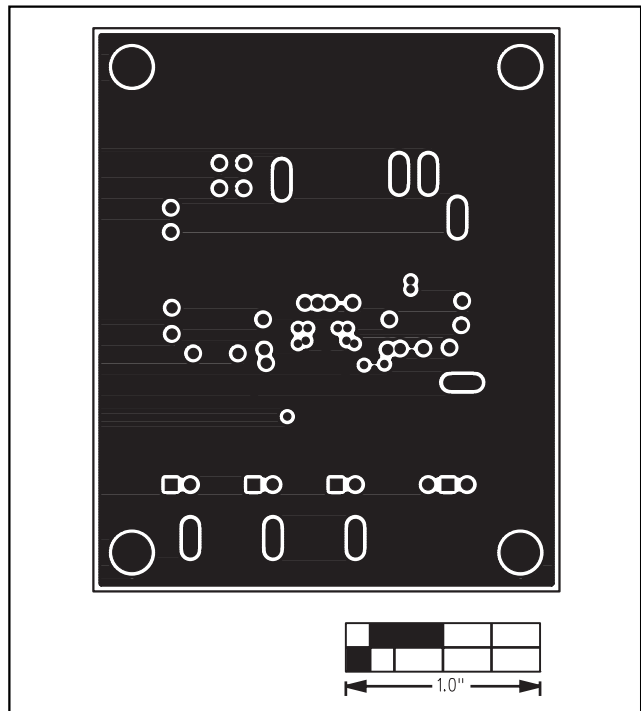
MAX1536 EV Kit PC Board Layout—Layer 3 (AGND)
